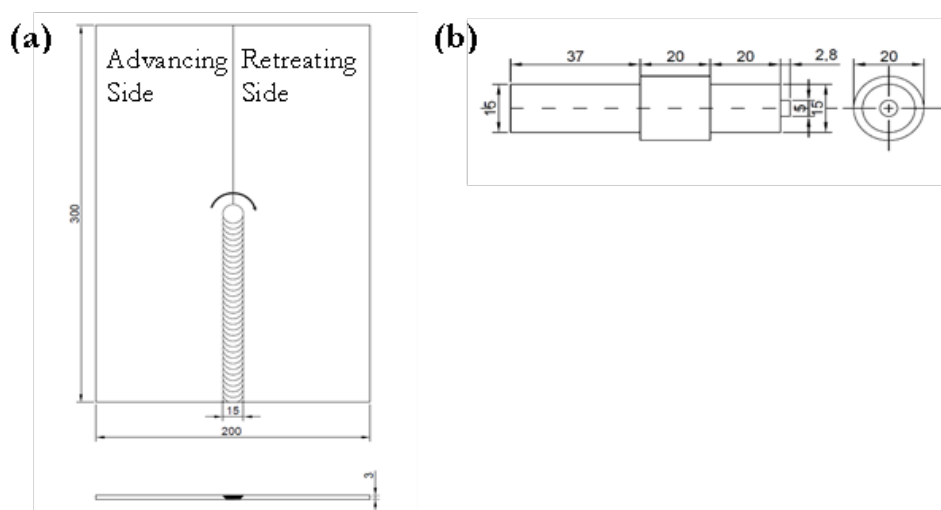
(a) Schematic of dissimilar FSW process, (b) Geometry of tool.
